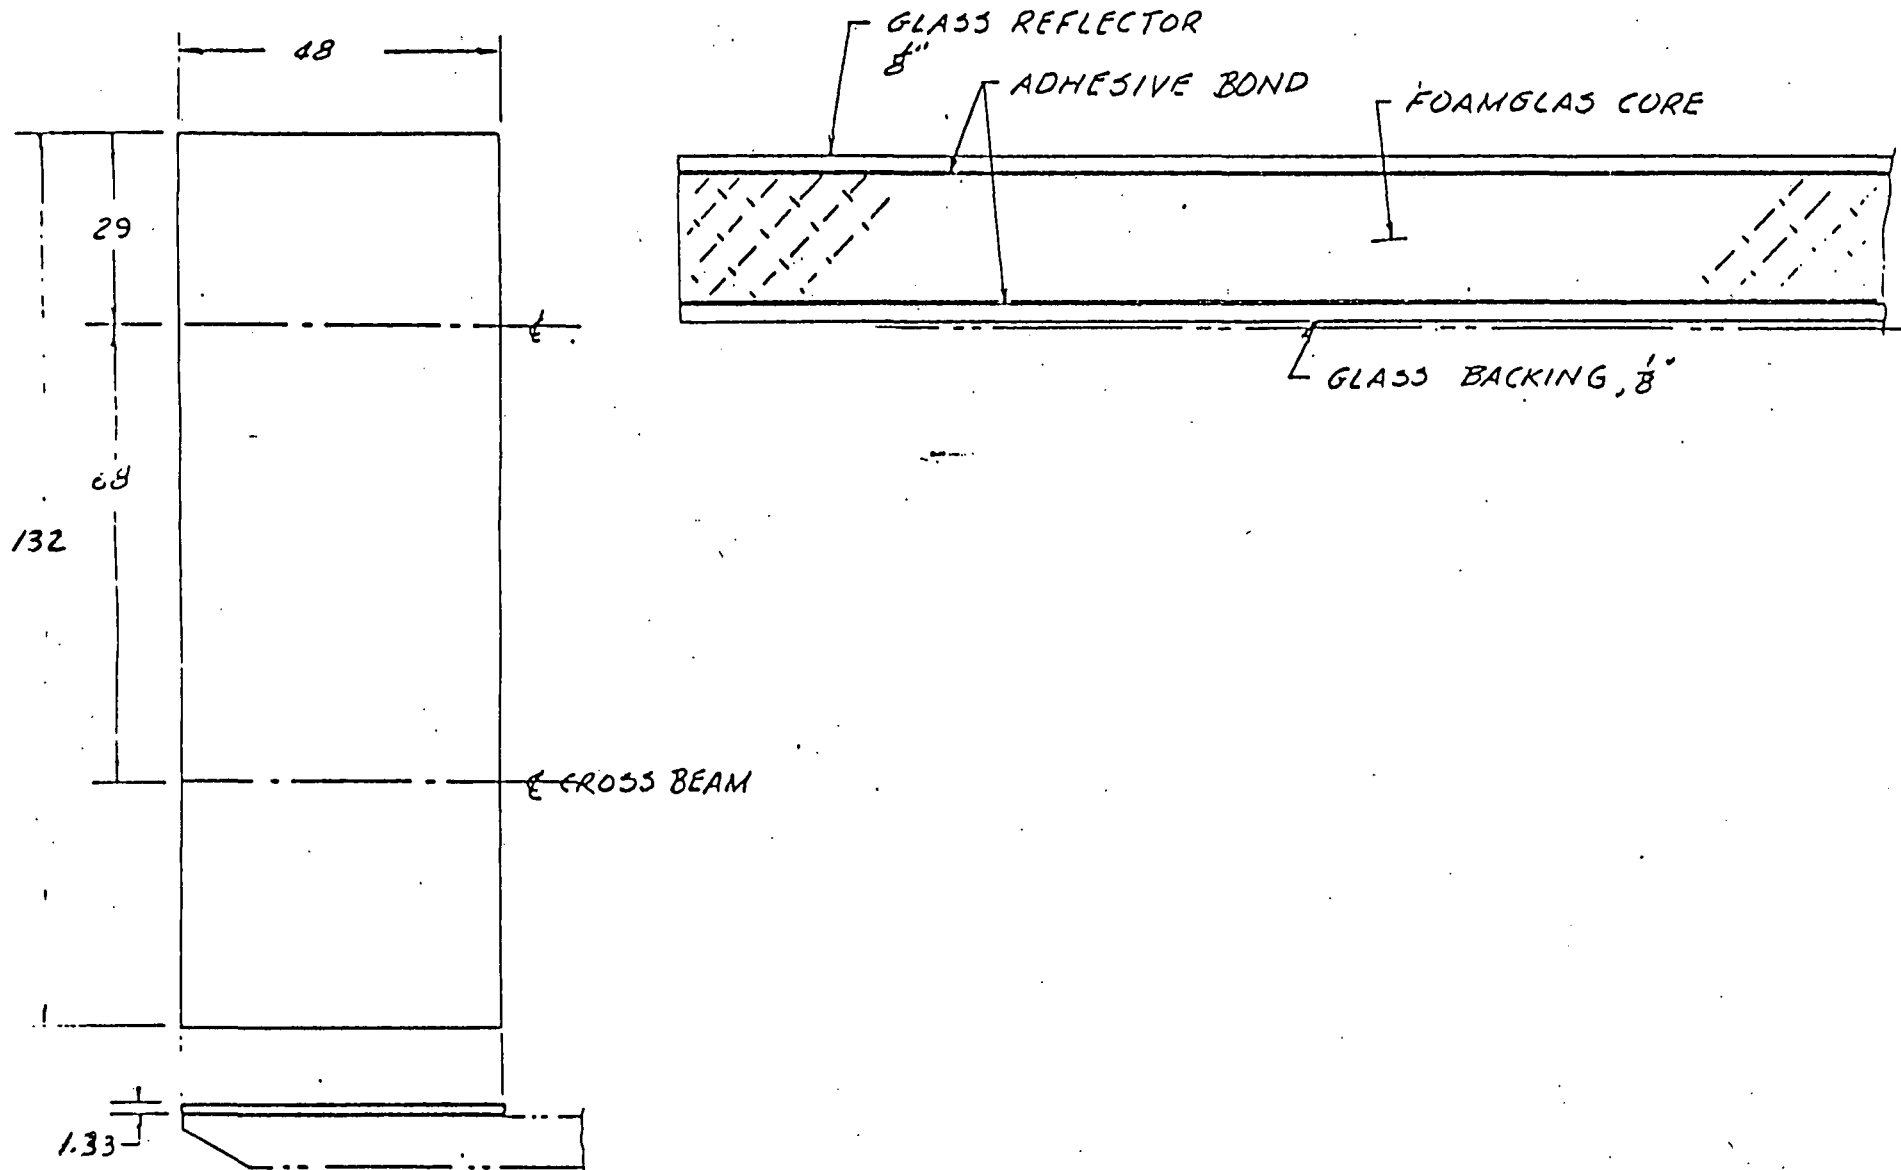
Alternate 5 - Foam Glass Sandwich
